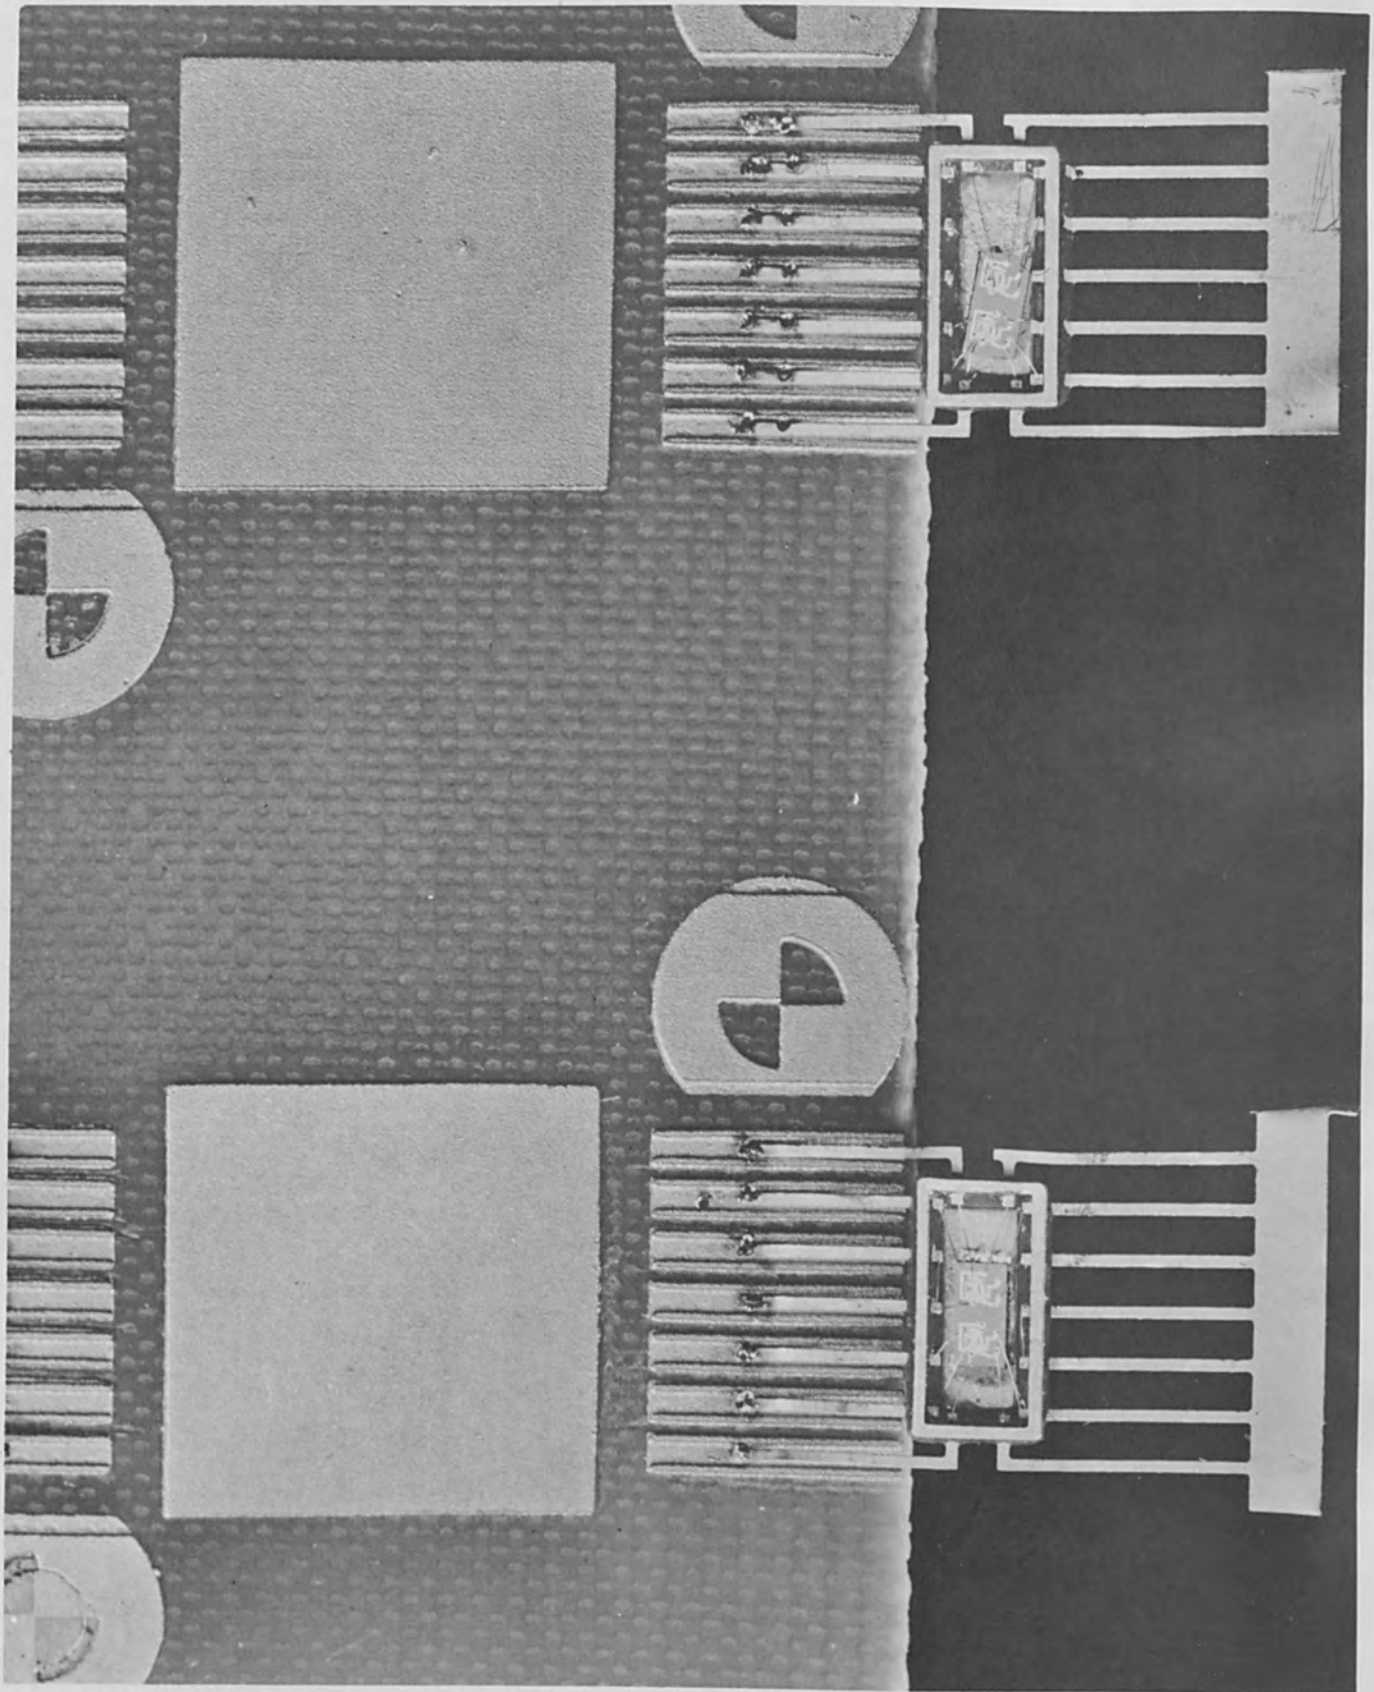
Flat packs laser welded to slotted printed circuit board.
